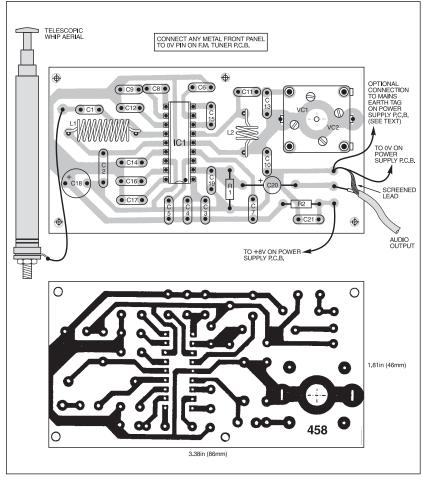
F.M. Tuner printed circuit board component layout, wiring details and full-size copper foil master pattern.
